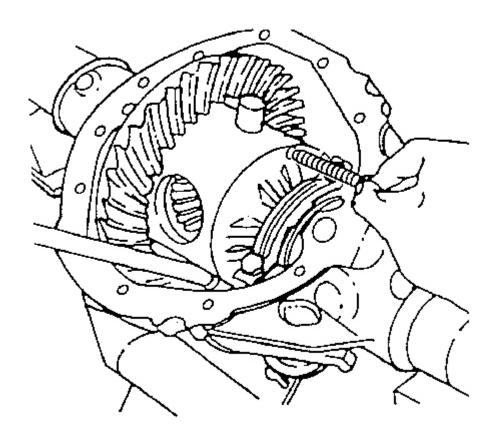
View Of Pinion Shaft Locking Bolt Courtesy of GENERAL MOTORS CORP.
